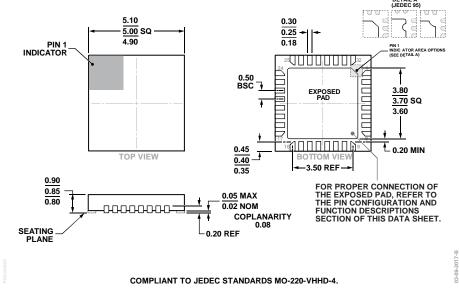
32-Lead Lead Frame Chip Scale Package [LFCSP] 5 mm × 5 mm Body and 0.85 mm Package Height (HCP-32-1) Dimensions shown in millimeters
